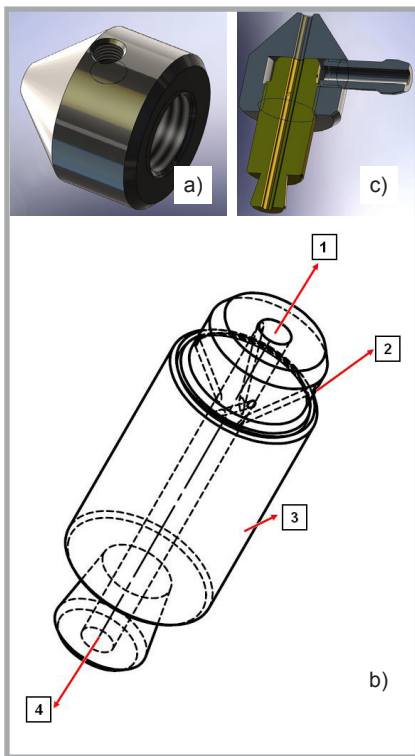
Nozzle head (a), nozzle body (b) and nozzle (c) (1: Nozzle inlet, 2: Injectors, 3: Twisting chamber, 4: Nozzle outlet).
